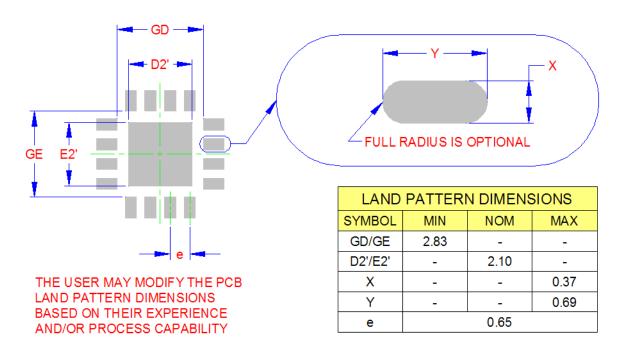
Preliminary 16-Pin QFN 4mm x 4mm Package Drawing
